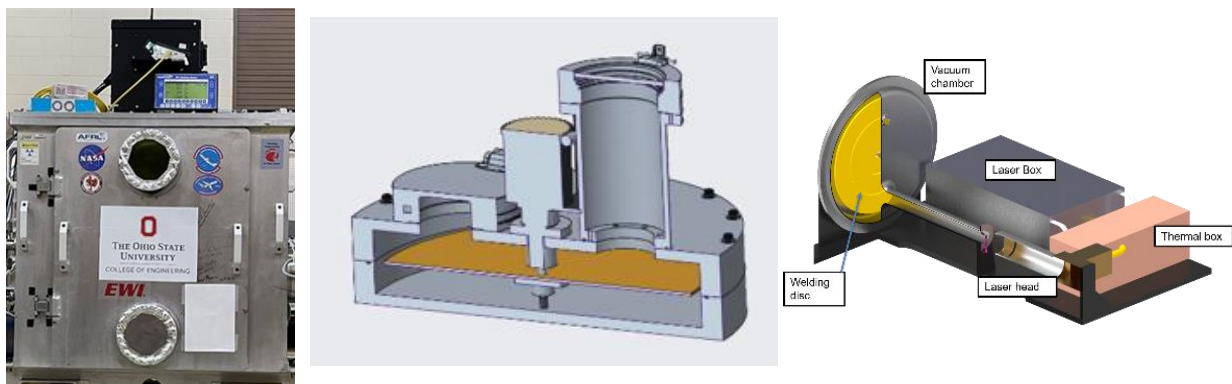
Parabolic flight hardware showing vacuum chamber with welding head mounted (left); CAD model cut-away of a vacuum chamber with access ports and optical/vacuum feedthroughs (middle); conceptual suborbital design from Advanced Concepts Office (right)
